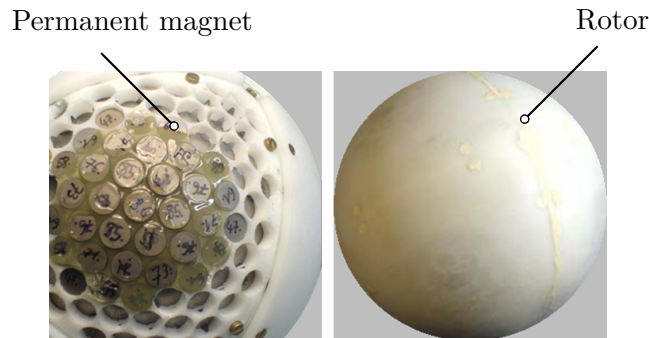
(Left) Spherical rotor during assembly showing cylindrical permanent magnets with different heights. (Right) Final rotor.
